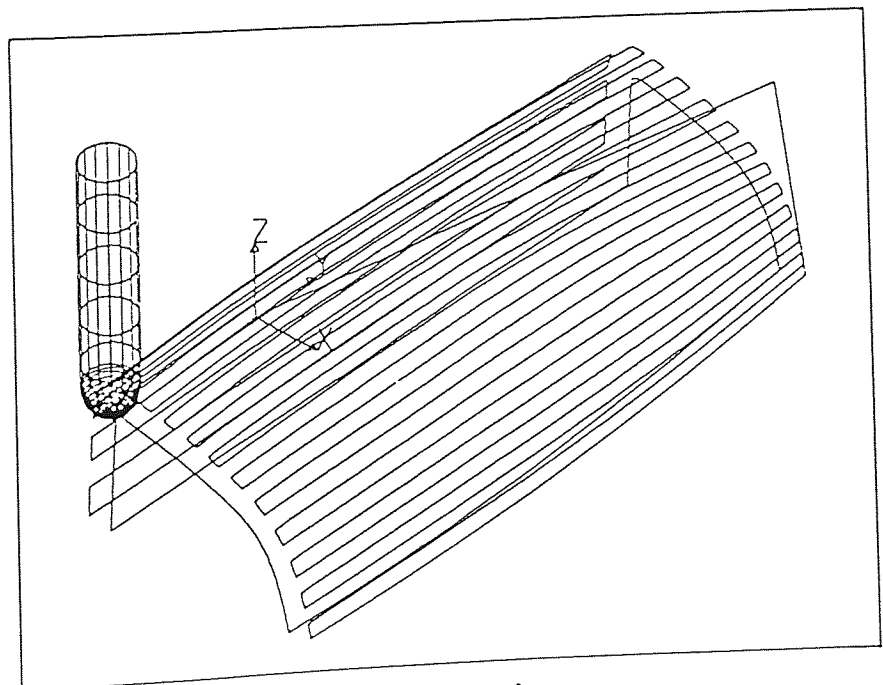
Machine Cutter Paths for a Lamp Surface.
